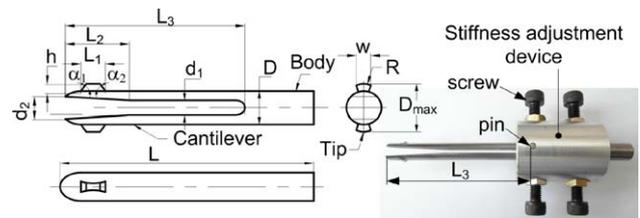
Deburring tool geometry and stiffness adjustment device.
